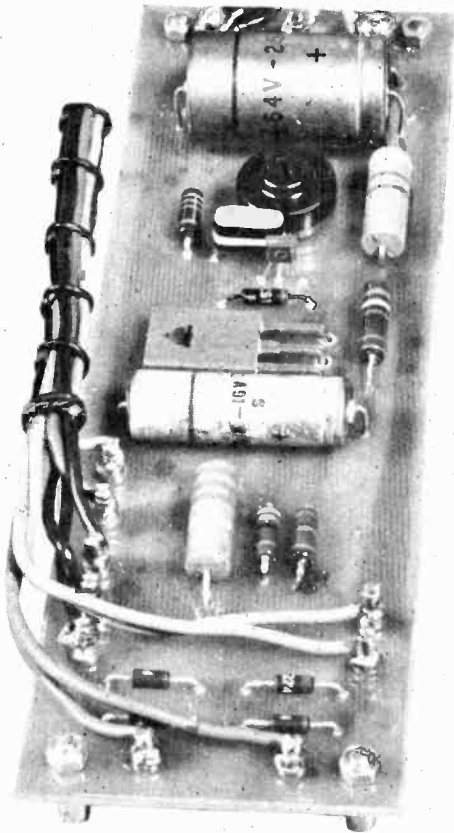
Layout and wiring diagram of the stabilised power supply printed circuit board. Finished size of this board is  $6\frac{3}{8}$ in by 2in
